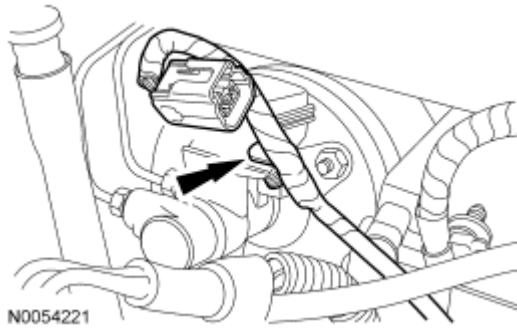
Locating Brake Fluid Level Switch Harness From Brake Fluid Reservoir
